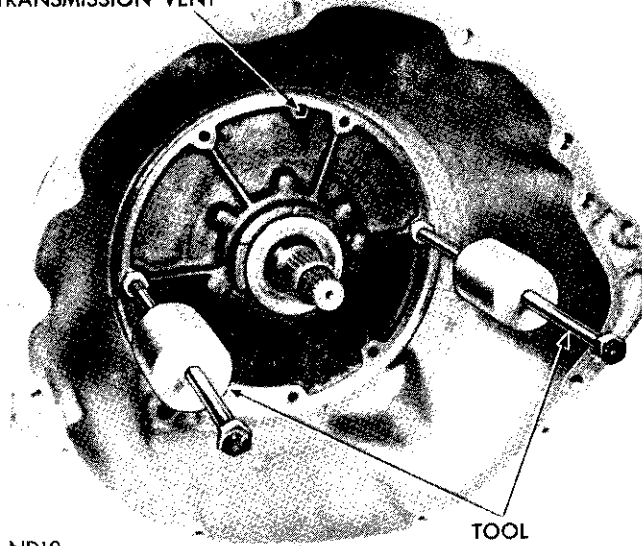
Removing Pump and Reaction Shaft Support Assembly
